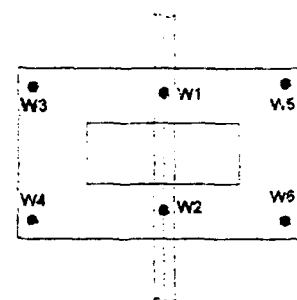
DKX fixation scheme -plan. W1-W6 spot welds
